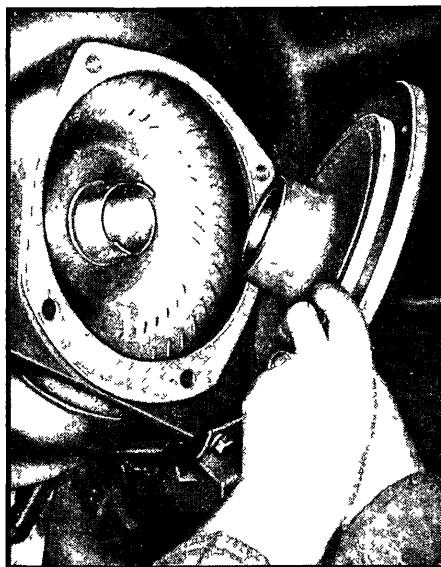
Converter aligning flange tool being installed on converter. 1950-52
